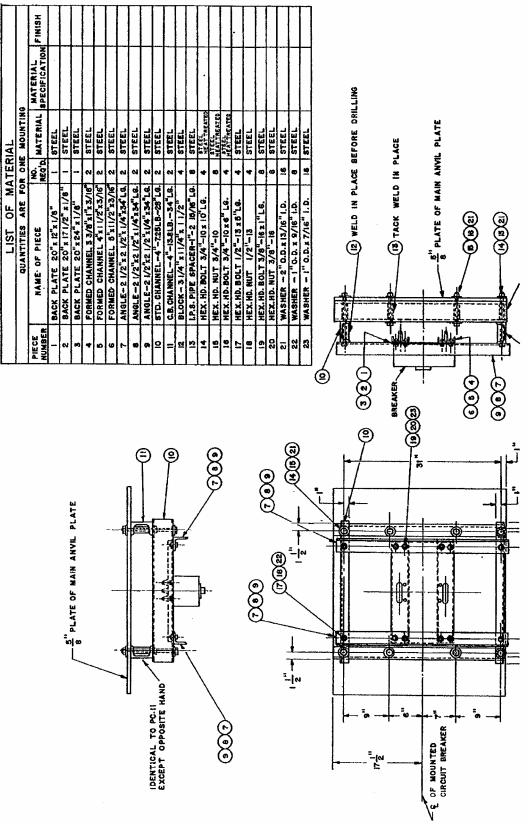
Standard mounting for shock testing drawout-mounted type AQB circuit breakers.
